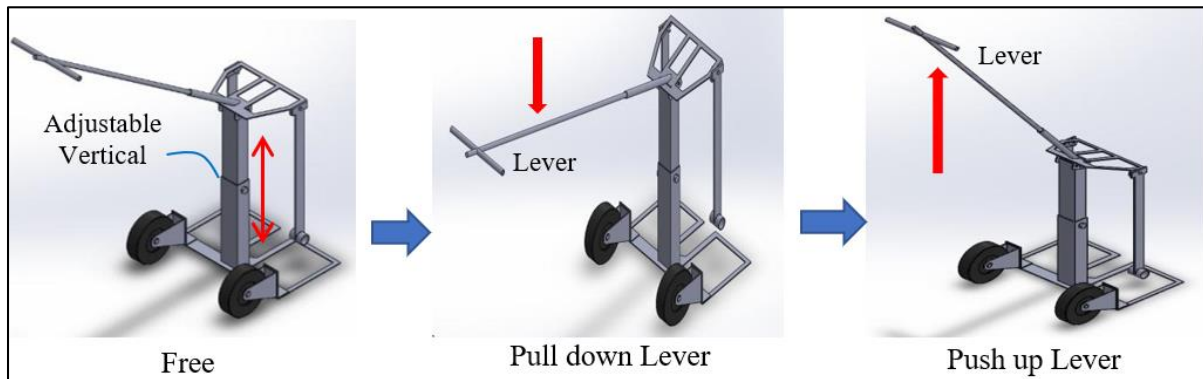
Working principle of Improvement of Portable Mackintosh Probe Extractor
